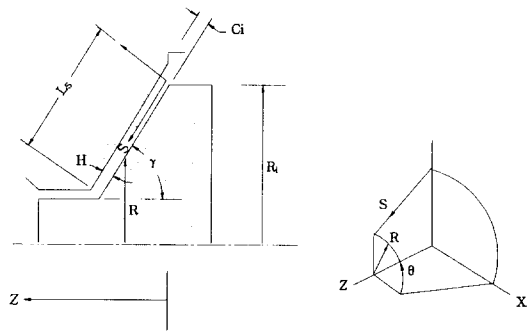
Configuration of impeller shroud and wear-ring seal and coordinate system.
